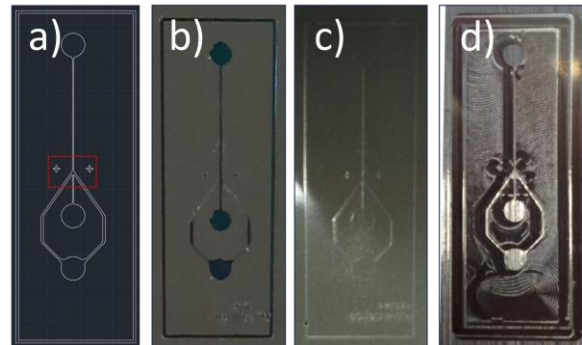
a) Schematic drawing of the mold (dashed red rectangle shows the flow focusing region with plus sign shaped alignment marks) b) Silicon mold c) Epoxy mold d) Aluminum mold
